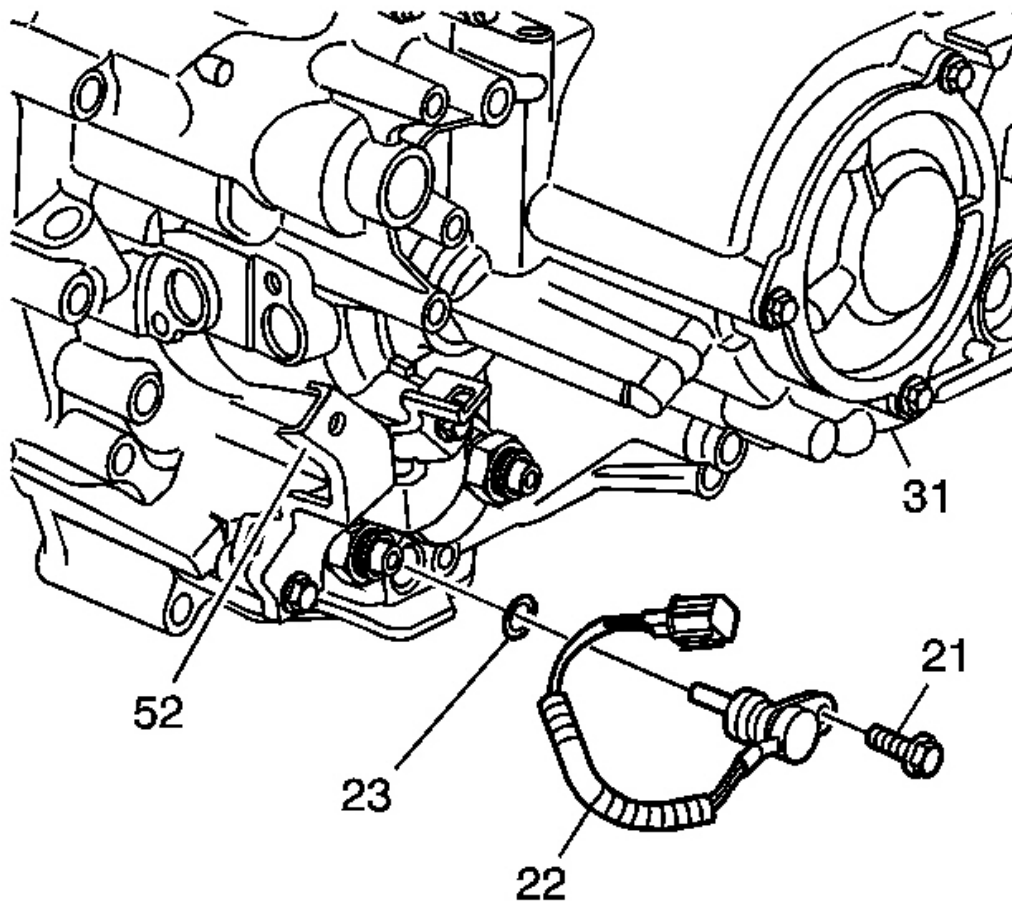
Fluid Temperature Sensor, Harness Assembly, O-Ring Seal & Bolts
